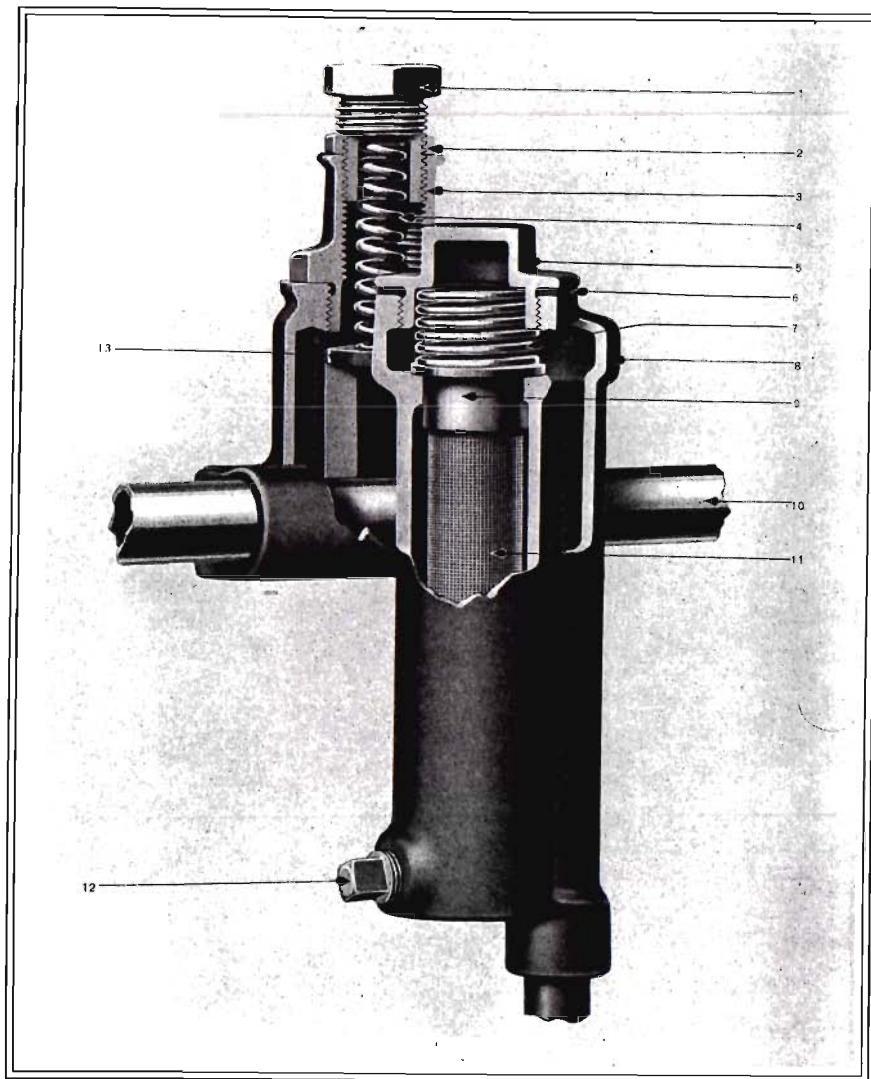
Motor Oil Manifold Strainer Body Assembly
